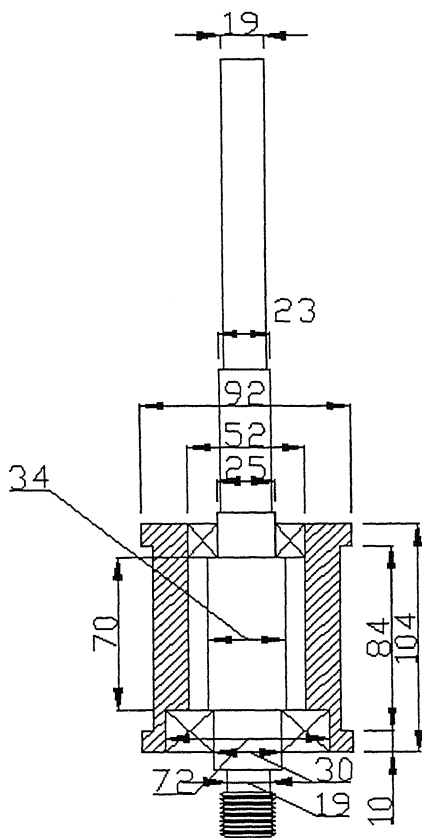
Schematic sectioned view of spindle and housing assembly
